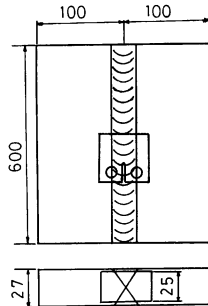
Configurations of a weld joint and CT specimens.
